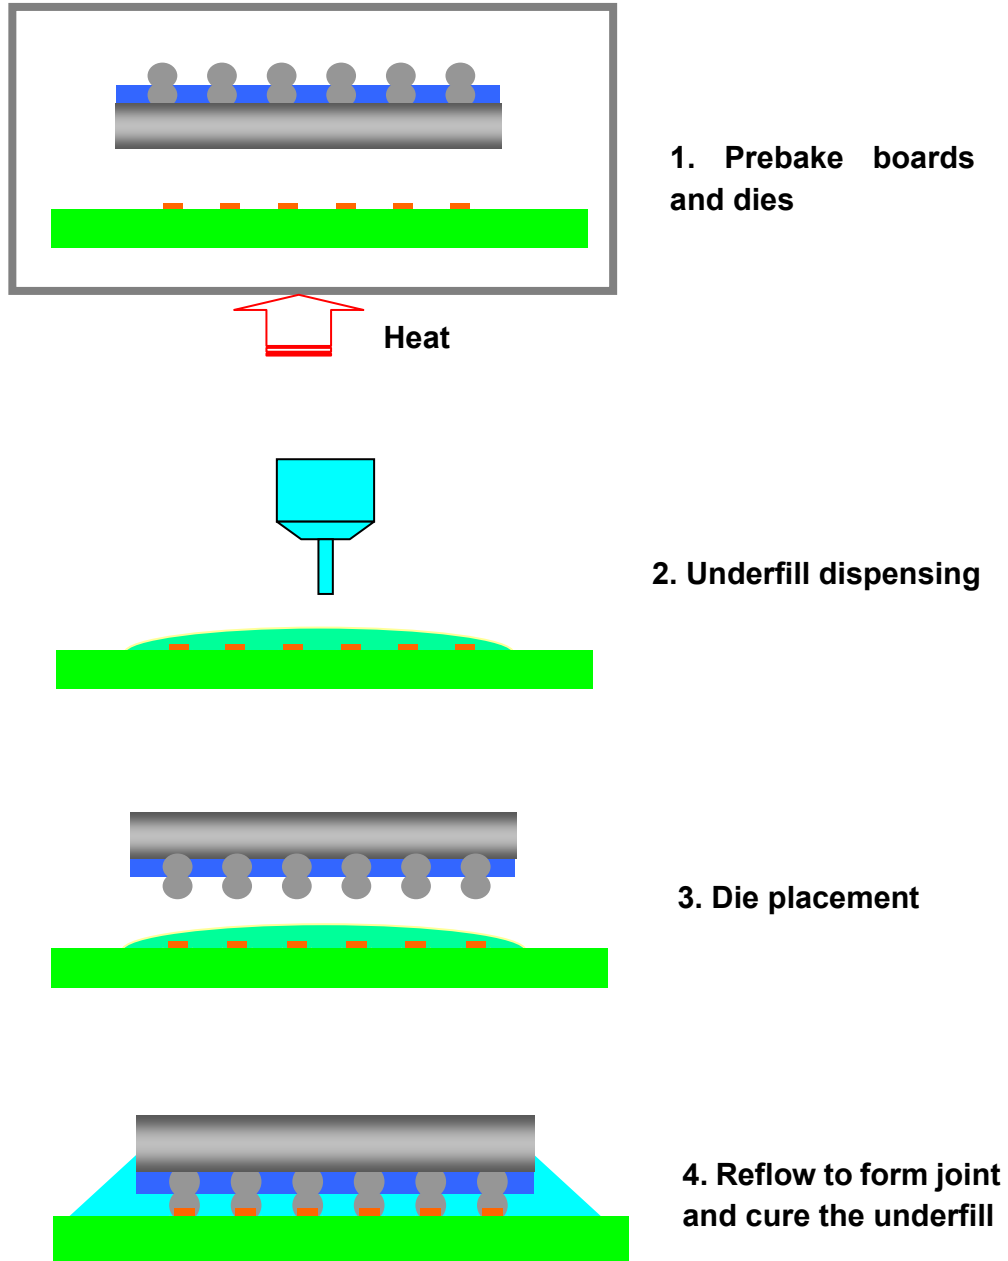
Illustration of the assembly process using no-flow fluxing underfill for double bump flip chips
